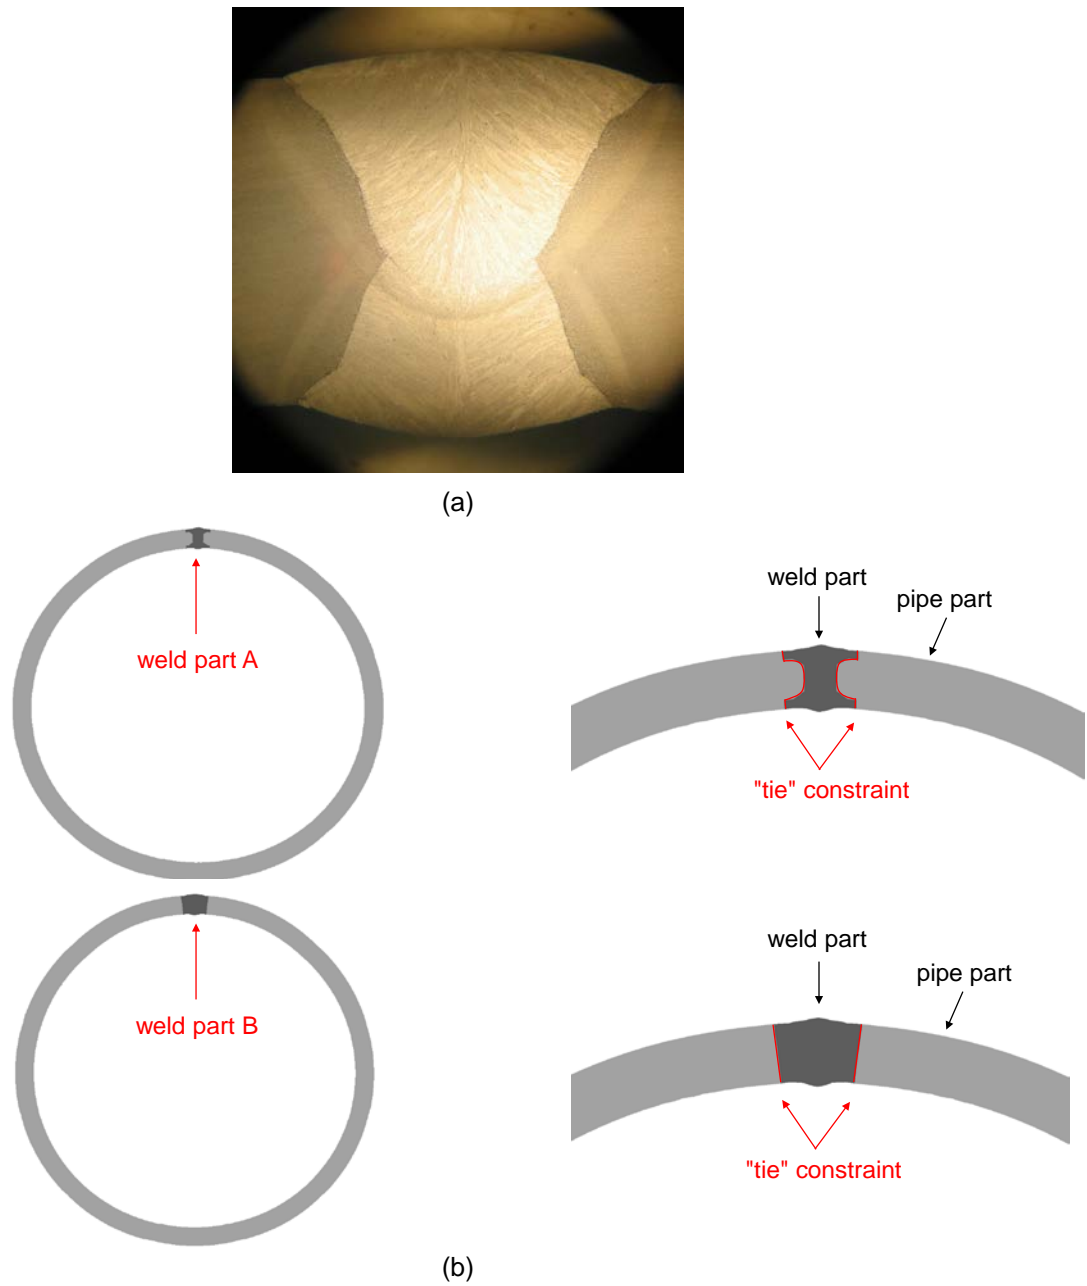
(a) Metallography of SAW weld of a 22.2mm thick X-70 line pipe provided by Corinth Pipeworks S.A.; (b) Schematic representation of the two different geometry configurations, used in the model for the weld part.
